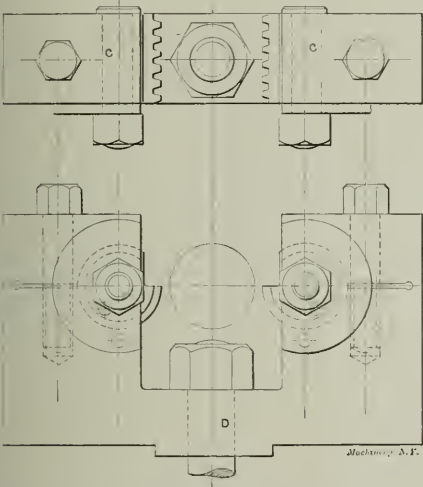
Double Tool-post with Circular-formed Threading Tool.
